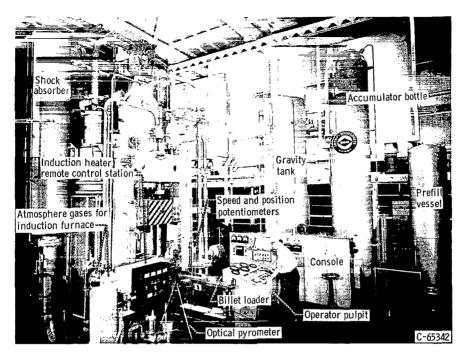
1021-Ton water hydraulic extrusion-forging press.
